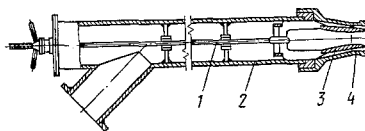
Gas burner GDG; 1) draft of throttle; 2) frame; 3) throttle; 4) nozzle.
